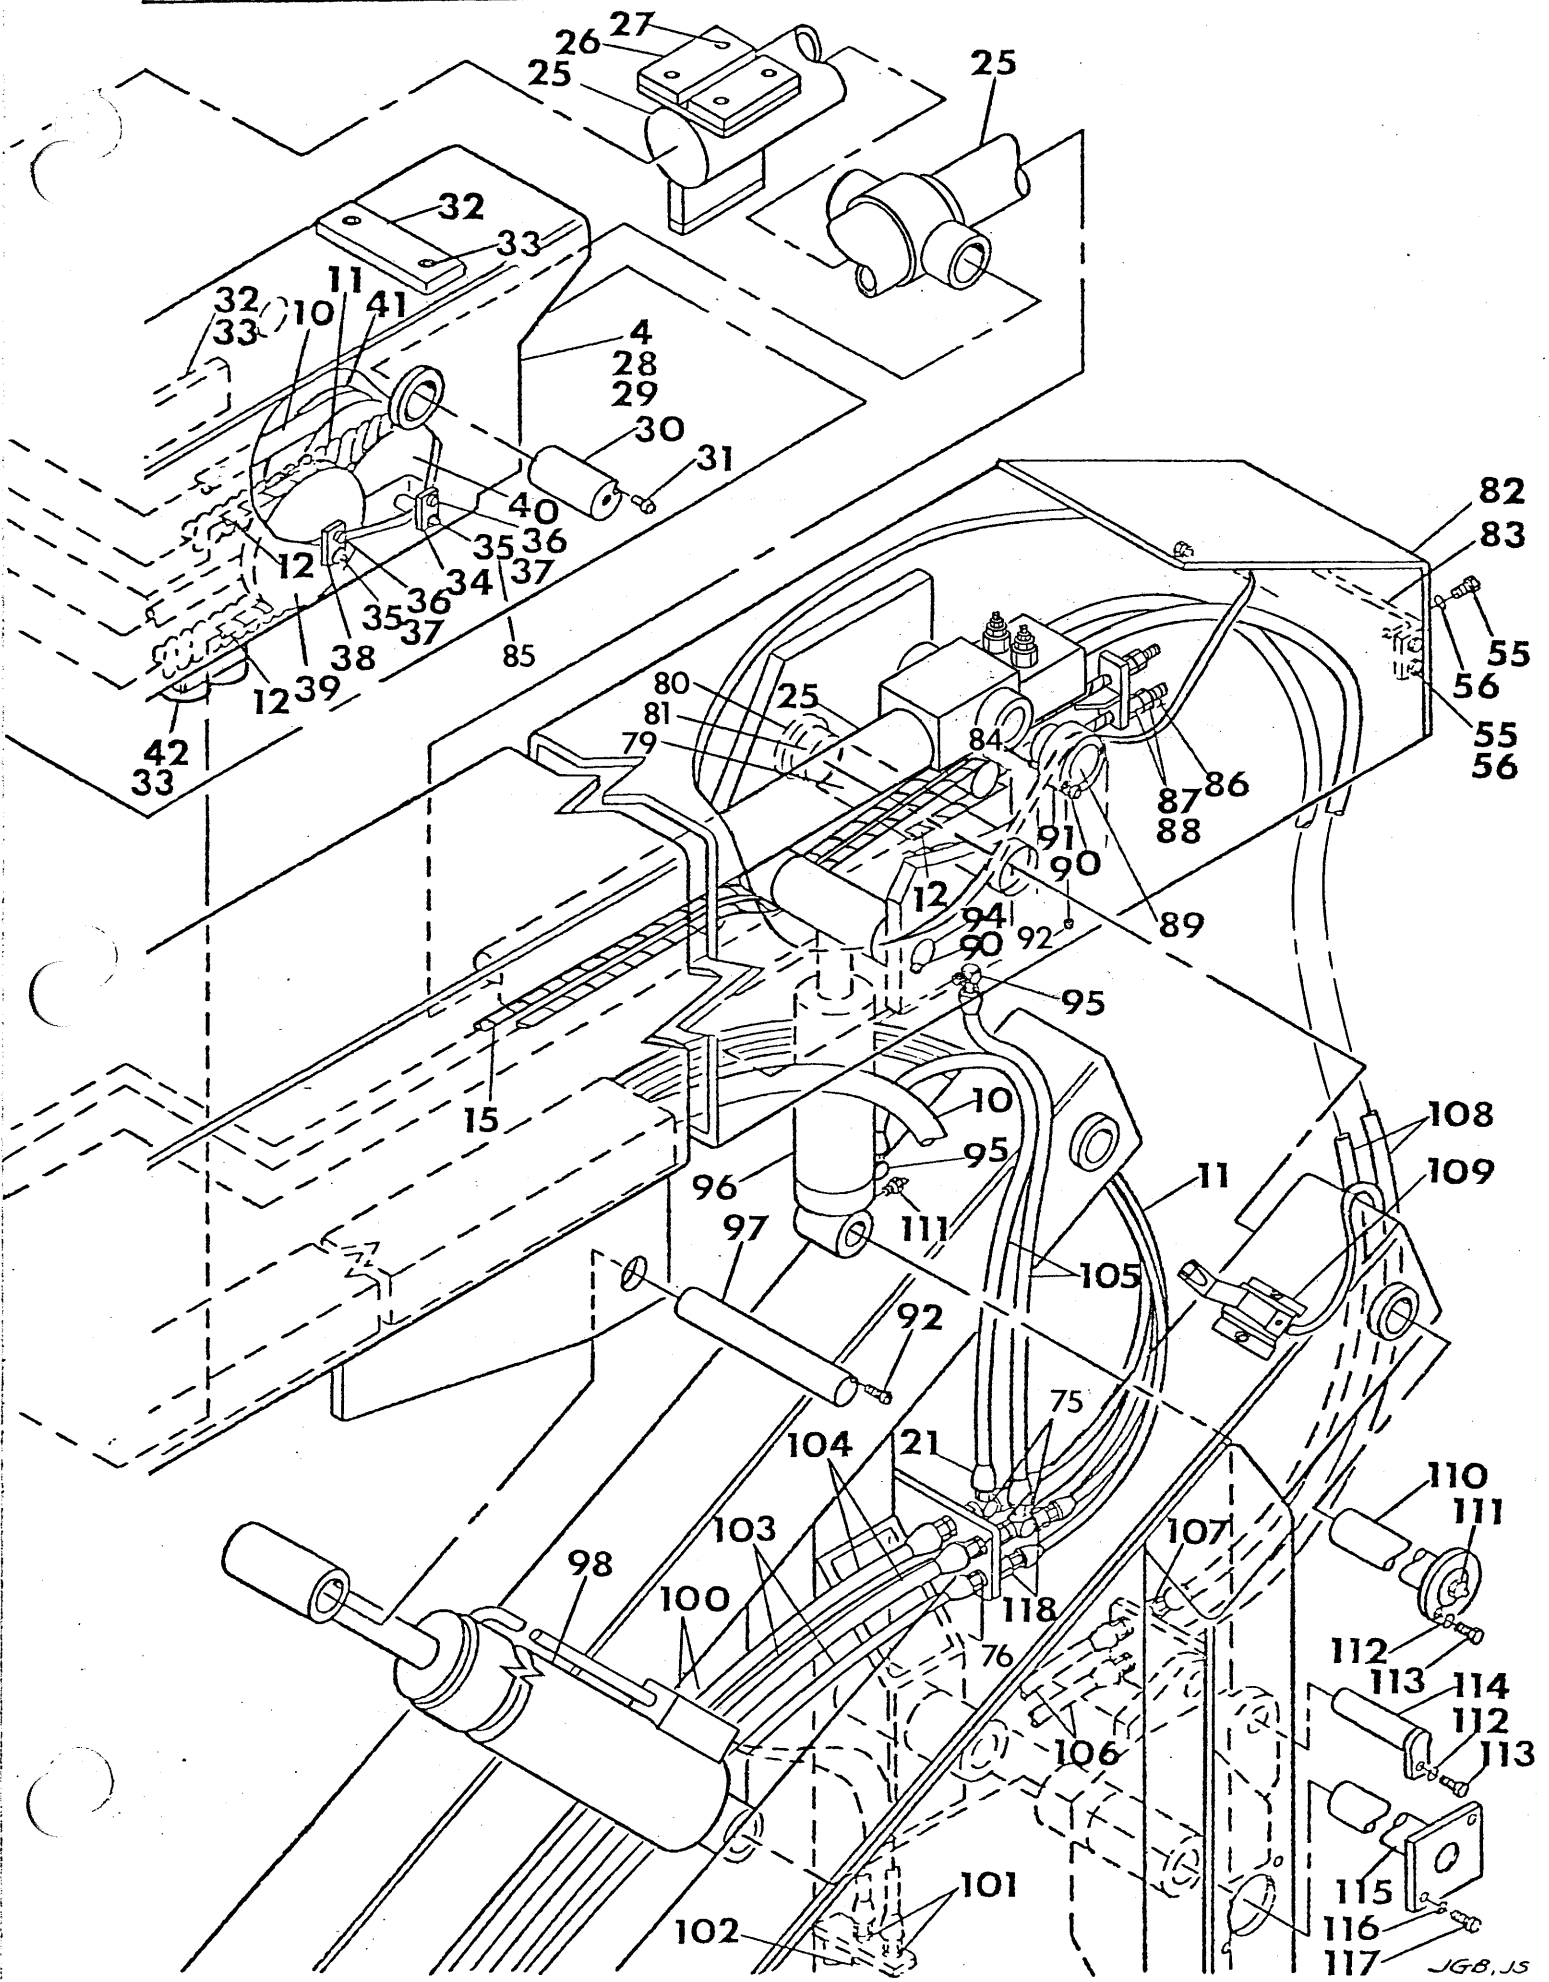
B BOOM ASSEMBLY (50 - Two Cable System) Beginning with Ser. #4820
